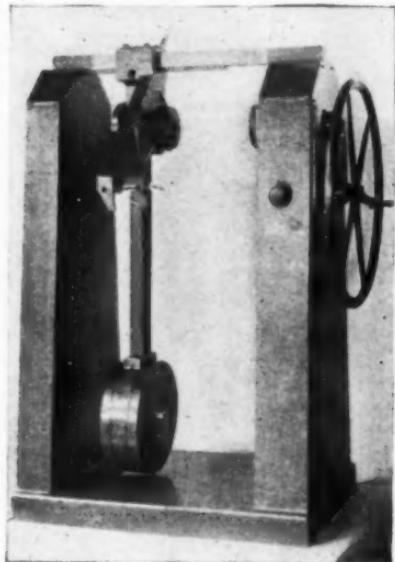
The new torsion testing machine — a striking example of design improvement through welding.
